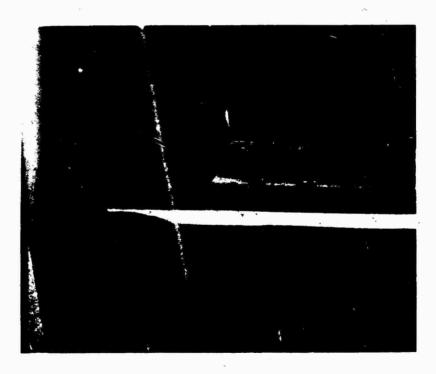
Flaking at the End of Planetary Ring Gear Teeth (P/N 204-040-331-5).
